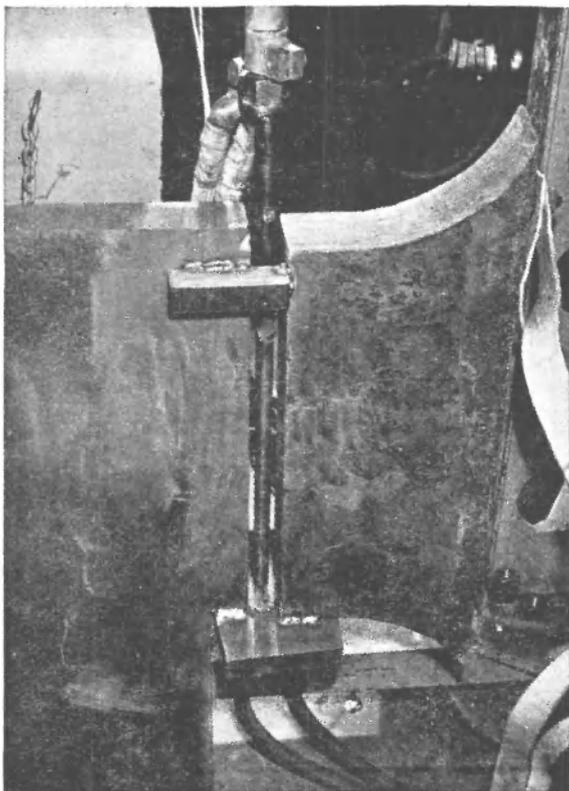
Butt joint between 3 in. thick Ducol W.30 and 2 in. thick B.S. 968 before welding, showing wire wool insert used for starting.
